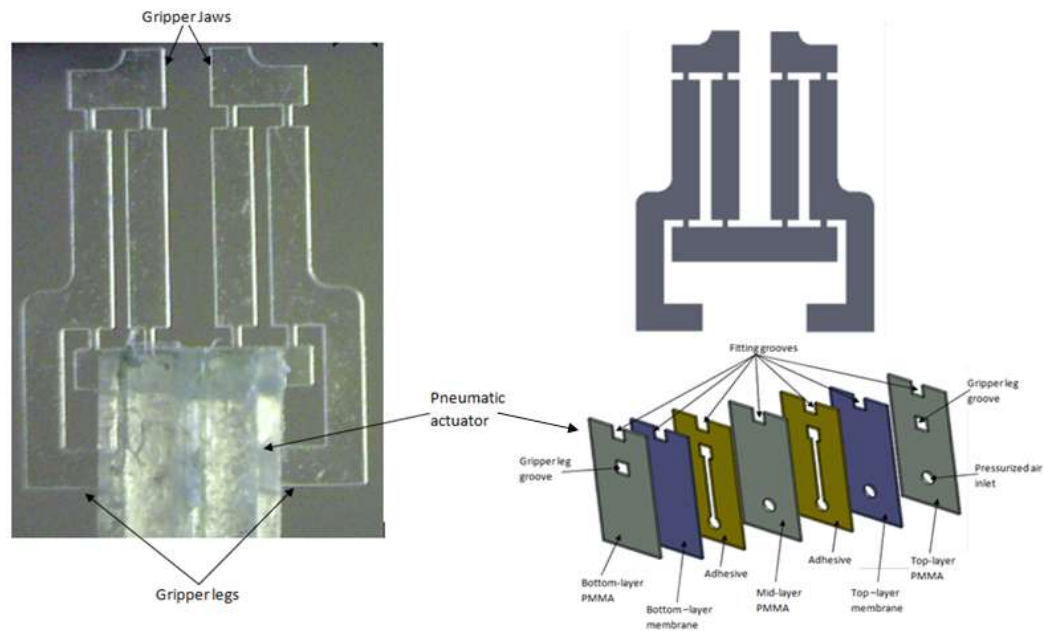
(Left) Assembled microgripper, (Right) Pneumatic actuator assembly
